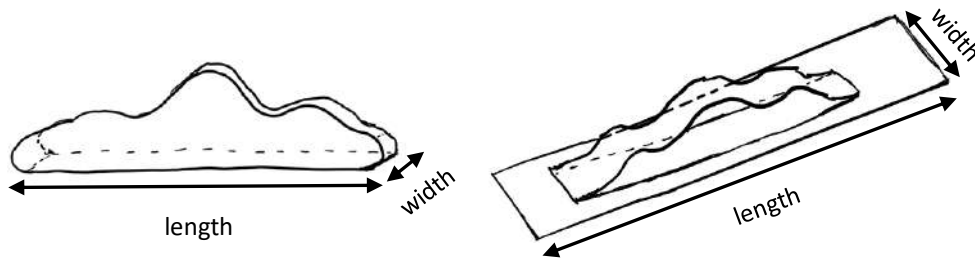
Sketches of the spring designs. Left: welded spring belt, right: spring with bridge structure
